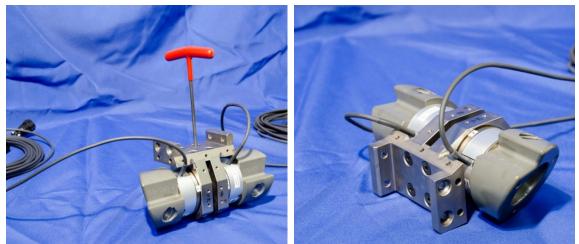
Bolt left and right load cell assemblies to rear plate
